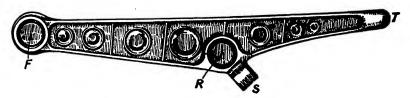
Magnesium-alloy Aircraft Engine Bearer
